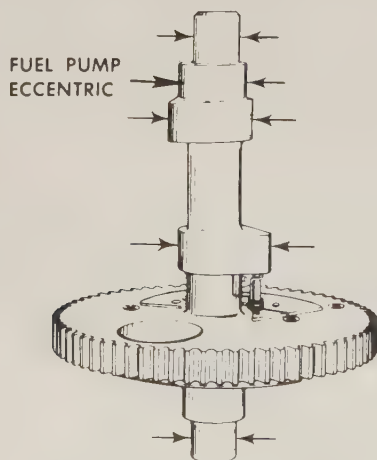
Points at which the camshaft should be checked. Tecumseh Products Company)
